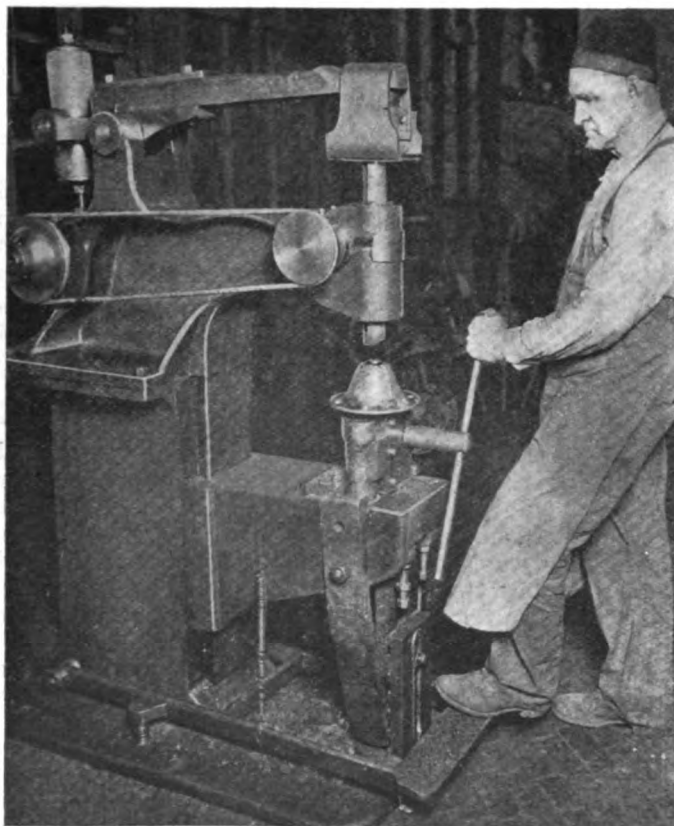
Securing driving flanges to rear axle shafts of three-quarter floating axle
